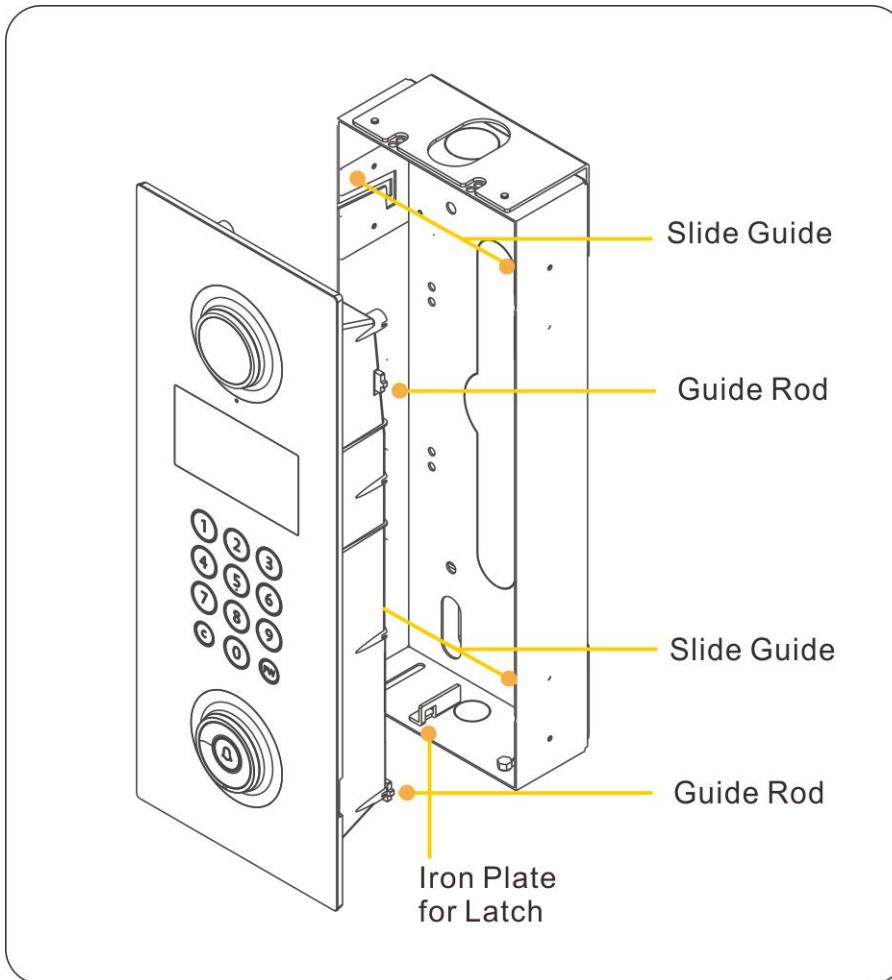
Install DP3010R Main Unit onto Wall Mounting Box
